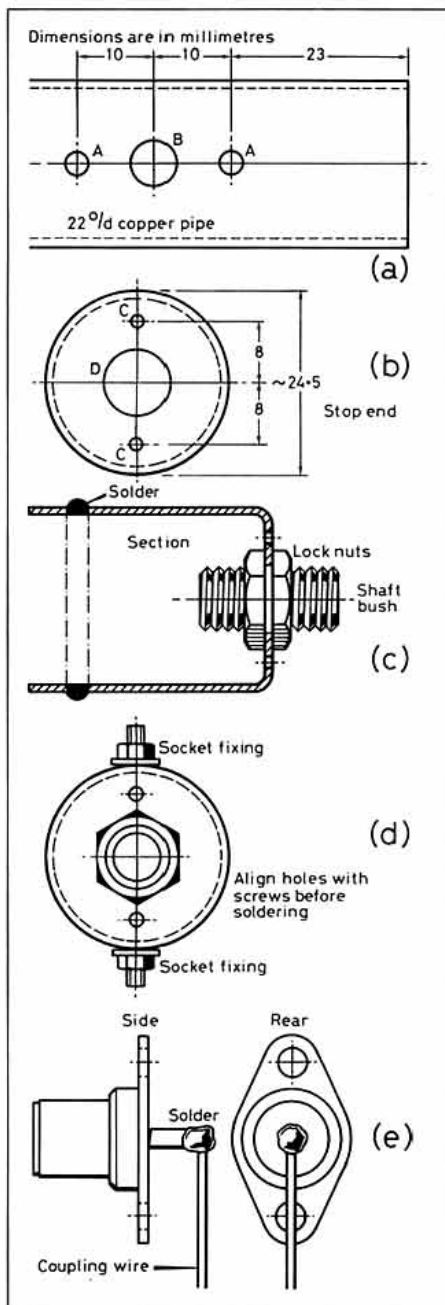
(a) Drilling coaxial socket mounting and clearance holes in copper pipe: Holes A = 1/8in (3mm), Hole B = 1/4in (6mm). NOTE: Hole spacings are given for Belling-Lee sockets. Different spacings/sizes will be needed for other sockets. (b) Drilling the stop-end. Holes C = 1mm, Hole D = 3/8in (9.5 mm) or to suit shaft bushing. (c) Fitting the shaft bushing to the stop-end. (d) Alignment of the stop-end and socket mounting screws before soldering. (e) Position of the coupling wires on the sockets. The socket spills should be cut to about 5/16in (8mm) long before positioning the wires.
